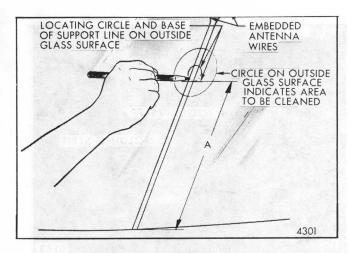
Locating Bonded Rear View Mirror Support on Glass
